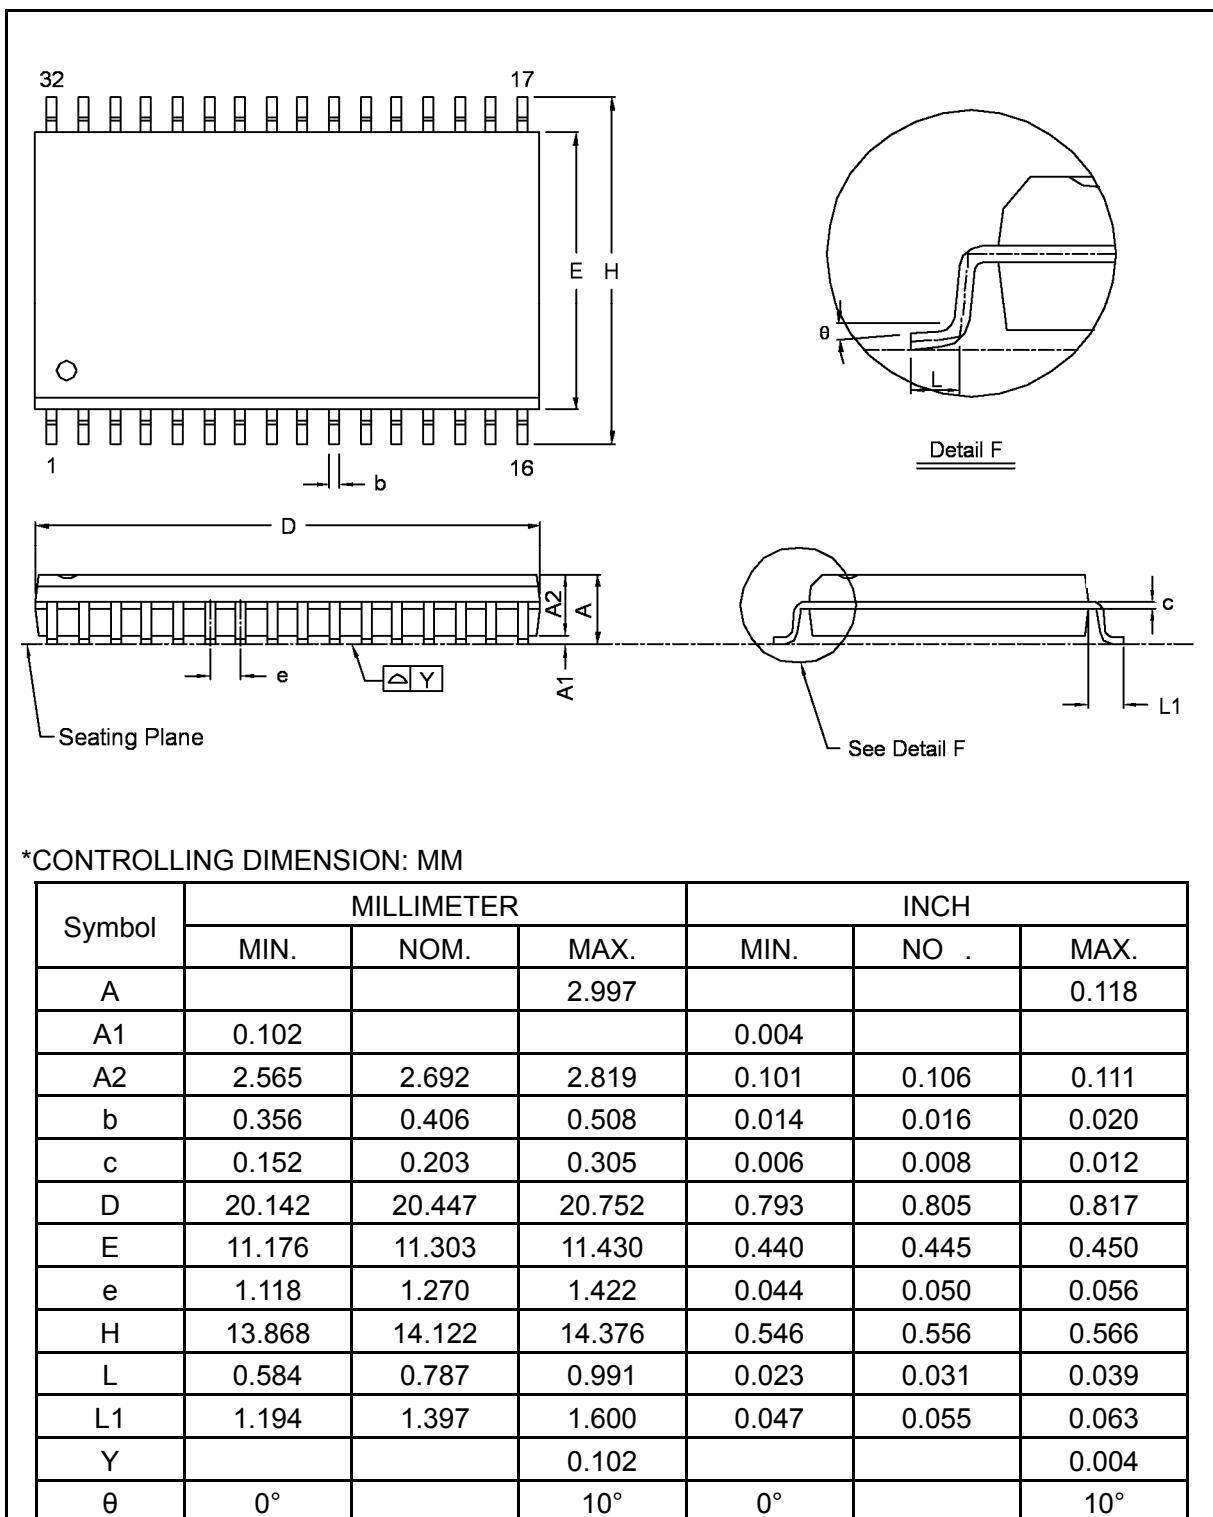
FM17XX 32-Pin SOP Package Dimensions
